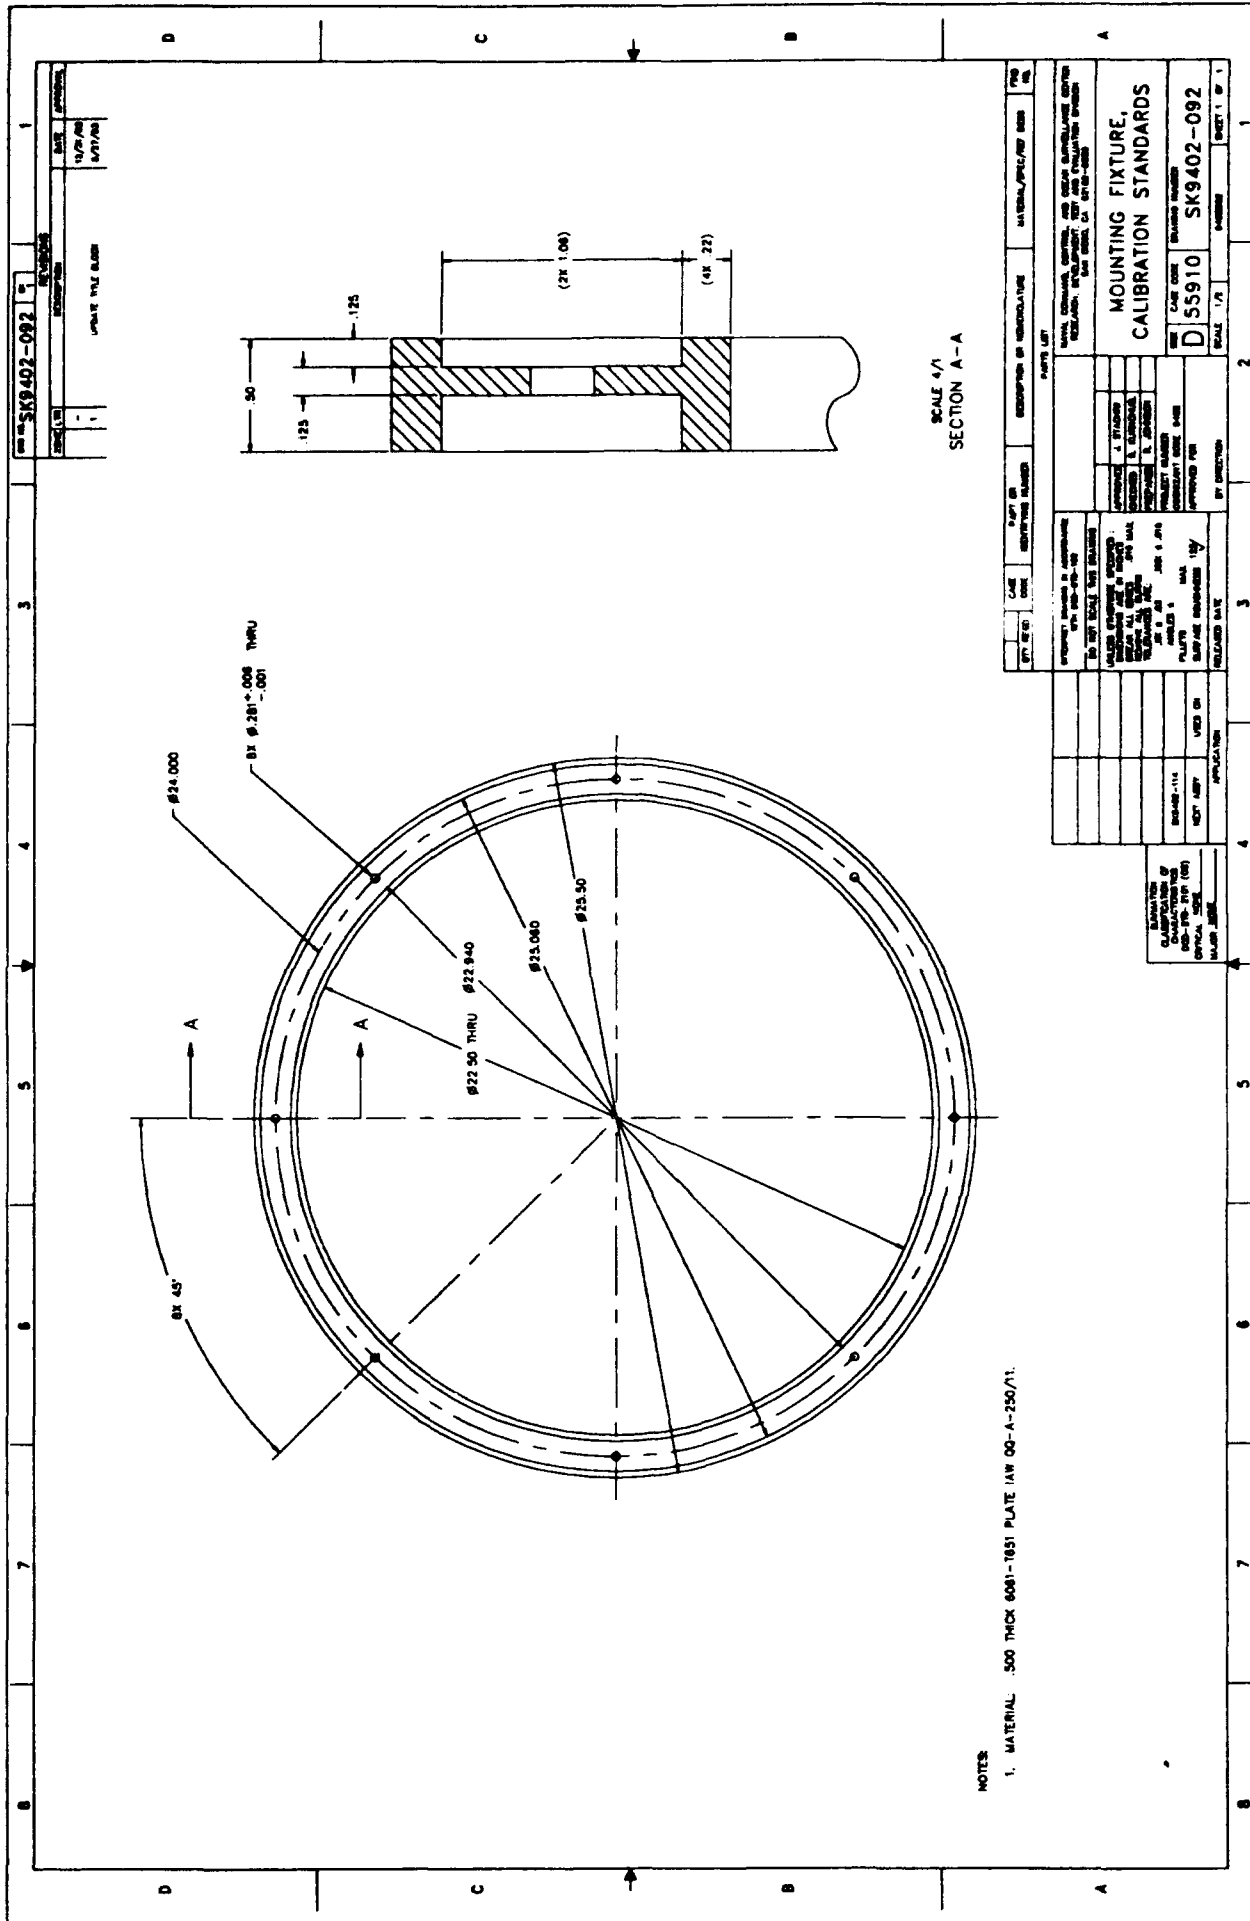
Engineering drawing for 25-inch diameter aluminum rings onto which curved ceramic specimens were mounted.
